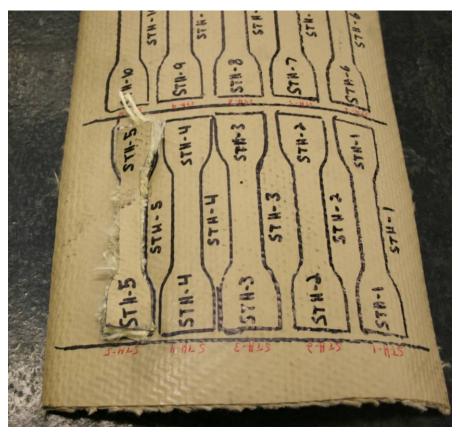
Specimen Layout and Extraction from Parent Hose Section
